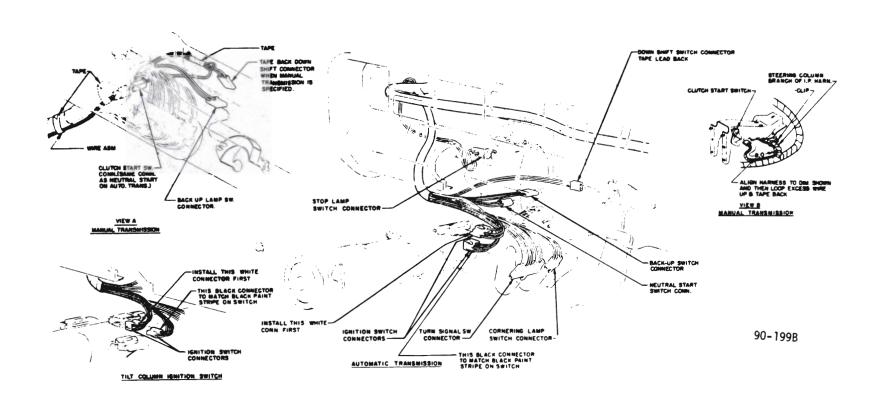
45-46-48000 Steering Column Electrical Connections
